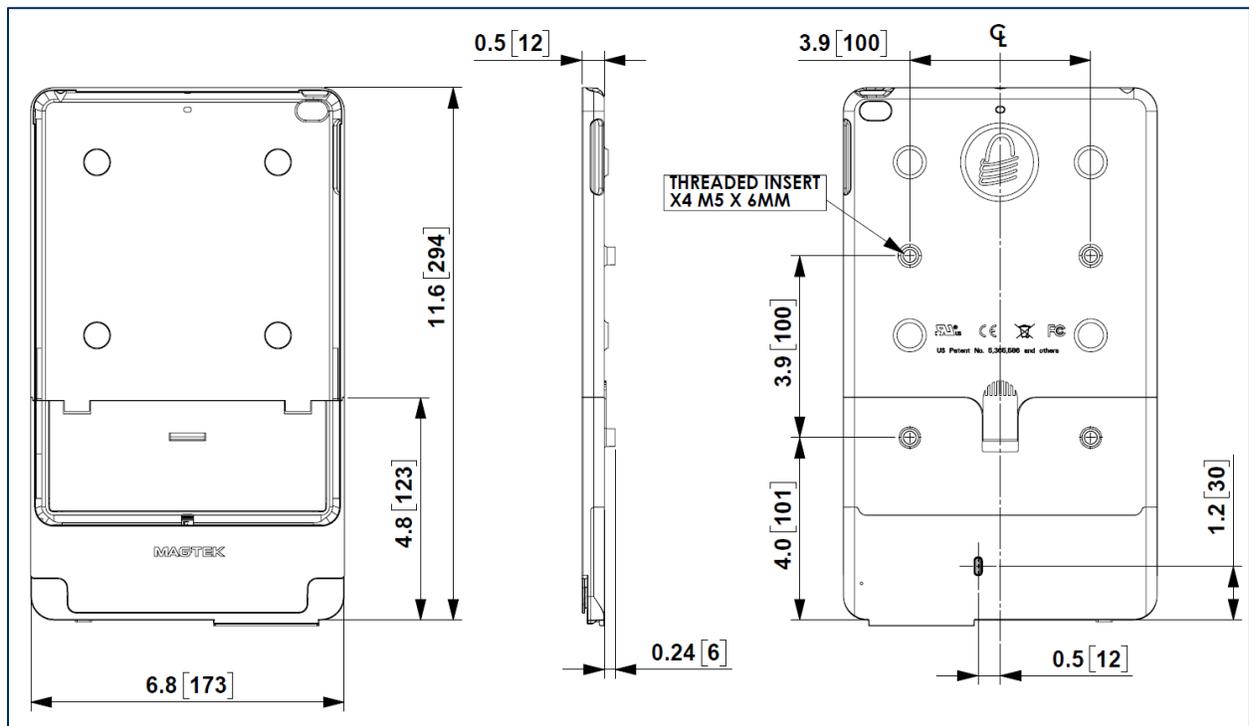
kDynamo Air Overall Dimensions and 100mm VESA Hole Placement, in Inches [mm]
